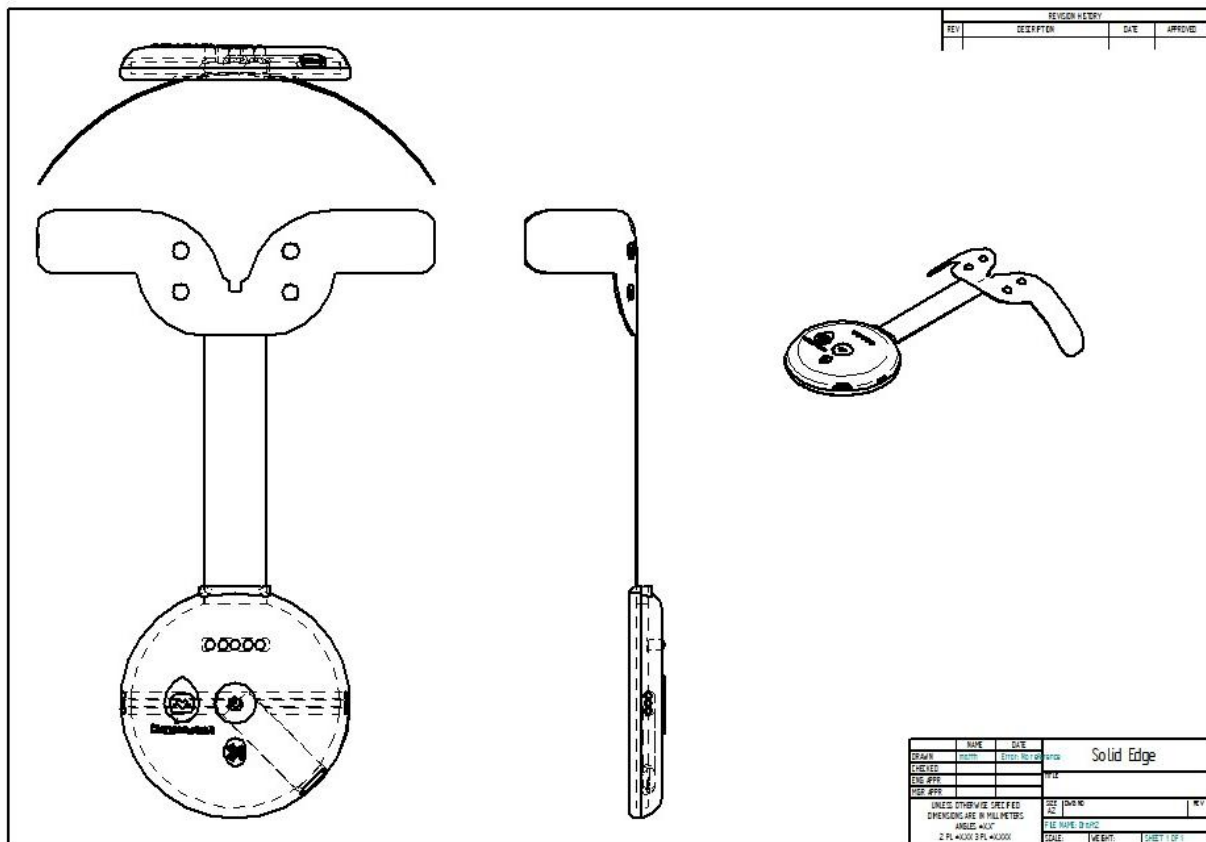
Detailed Part Drawing of the Haemo.mon Device
